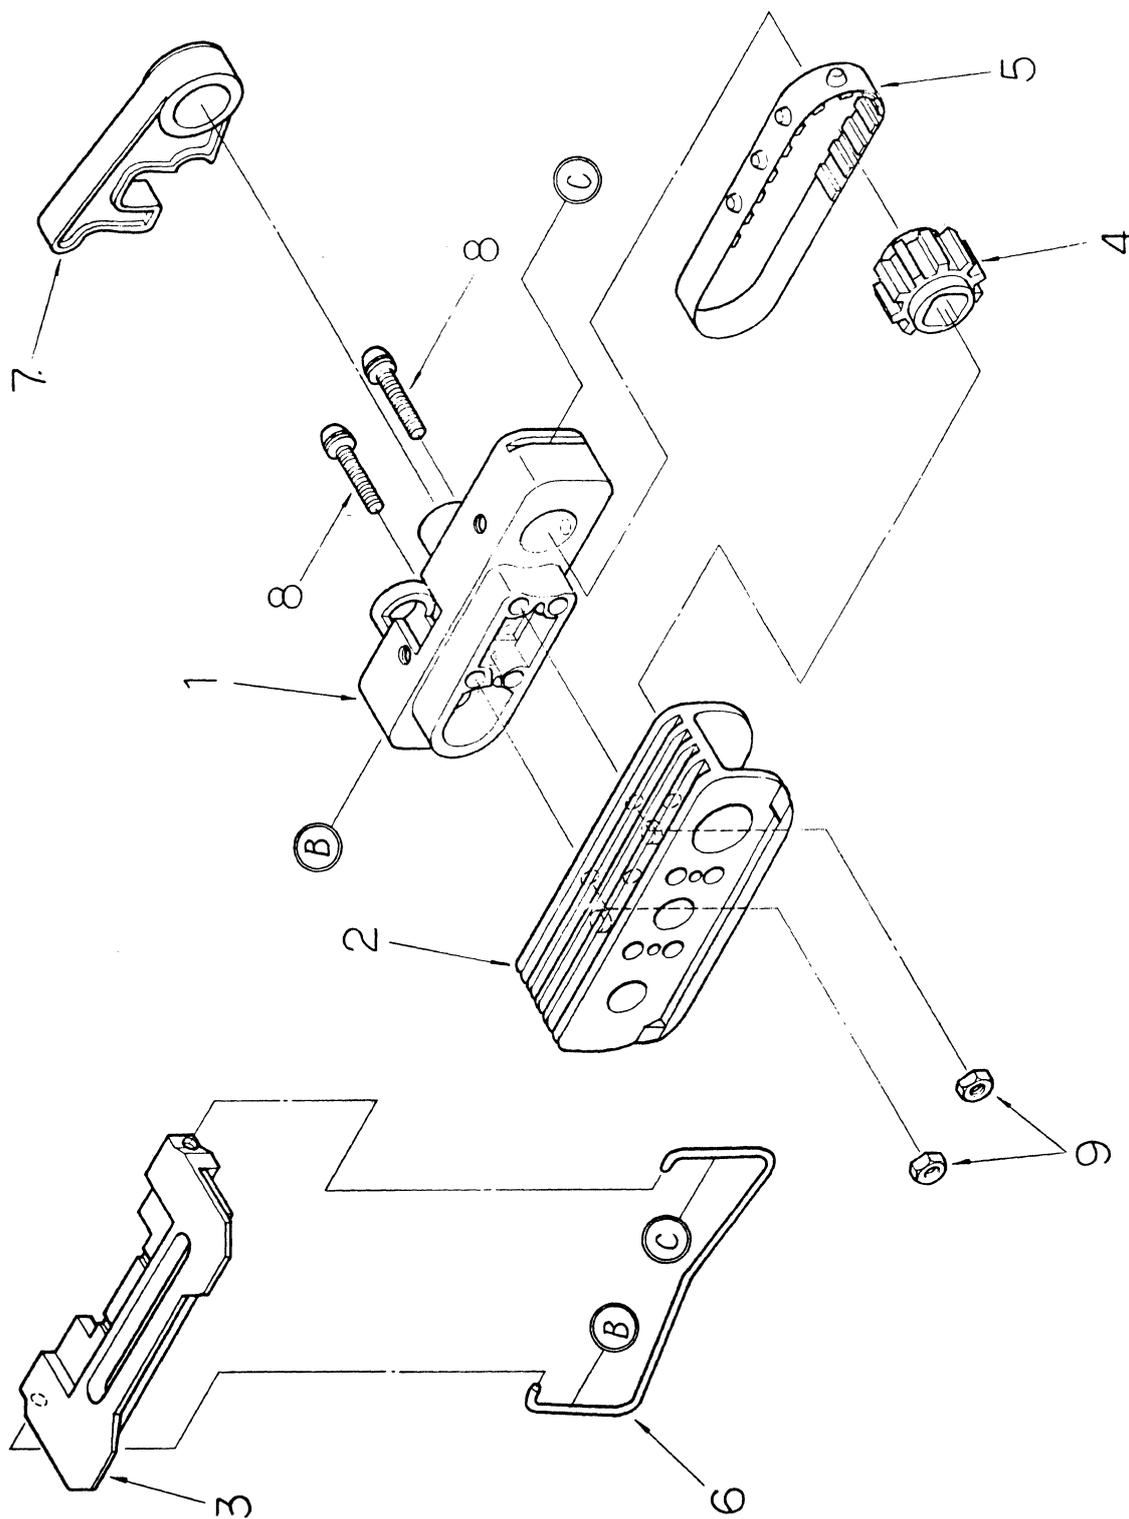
Sprocket Assembly (R) (FMX-35100-2)
